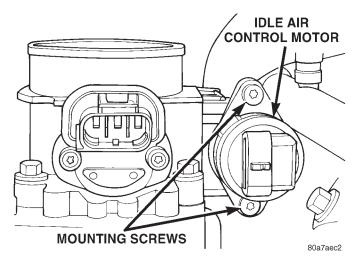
Mounting Bolts (Screws)—IAC Motor—4.0L Engine
